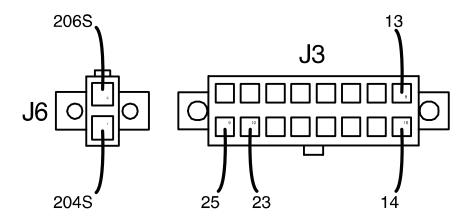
Weld control board plug J3 and J6 lead locations
